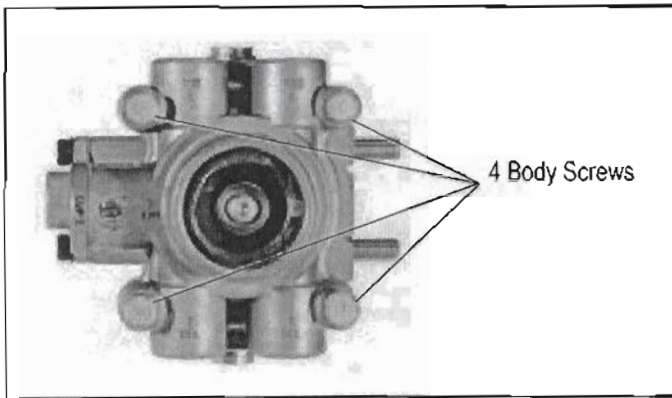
BOTTOM VIEW OF SR-7™ VALVE
